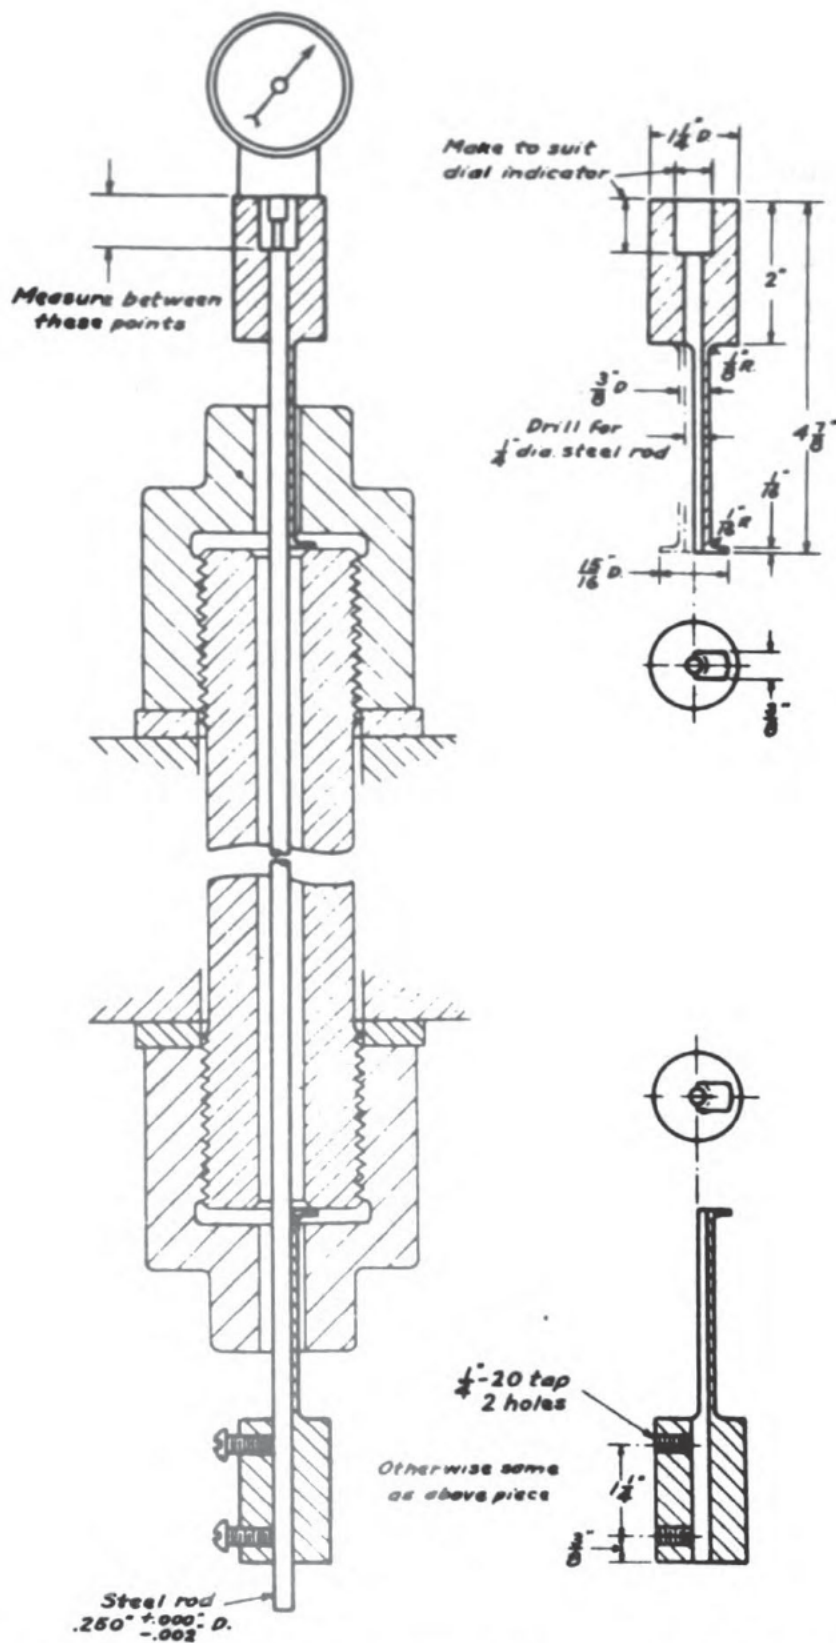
Device for measuring elongation of bolts (hole in nut is same size as hole in bolt).
